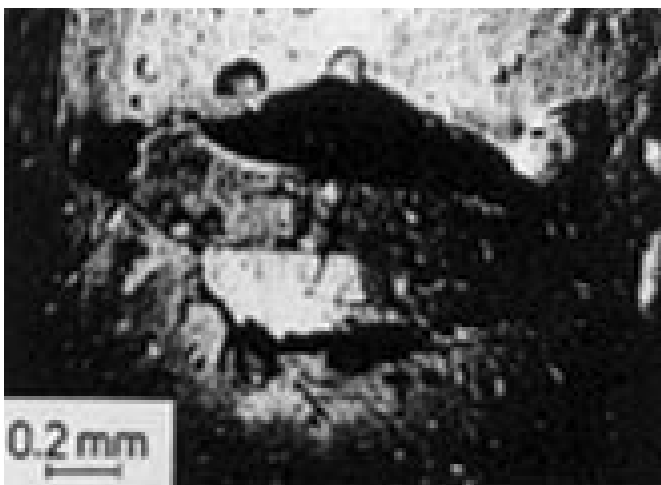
Raceway of inner ring of ball bearing after 150 hours of test
